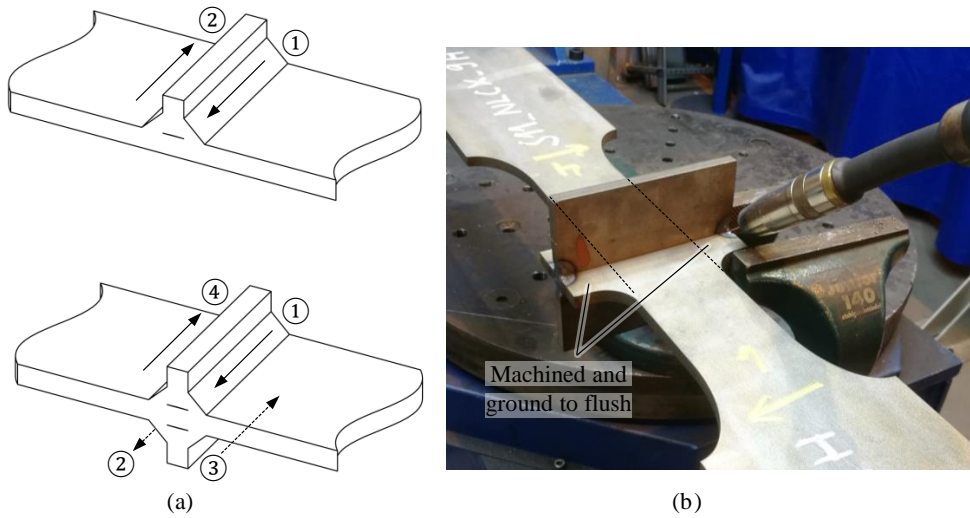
(a) Welding sequence and directions of T and cruciform joints, and (b) welding preparation of test specimens.
